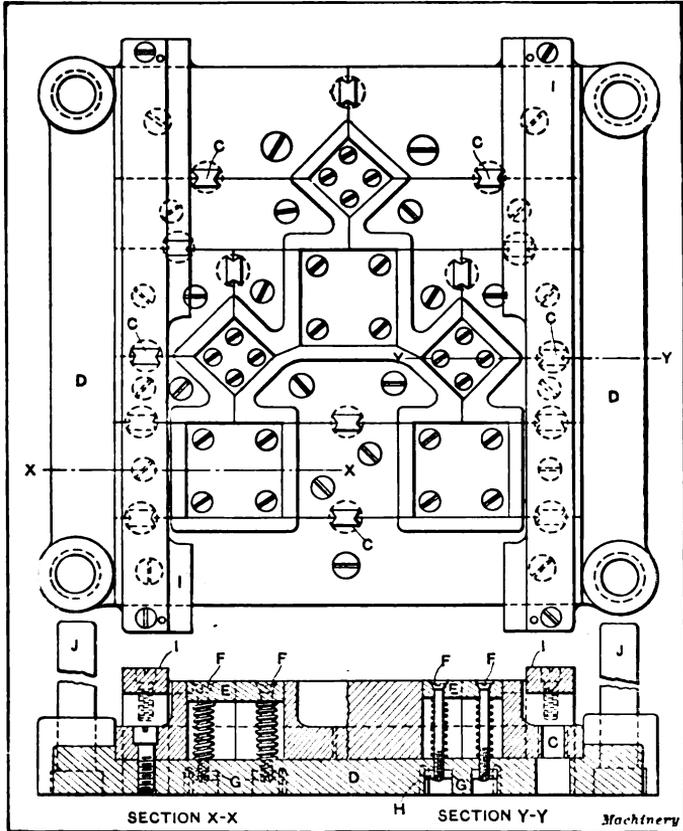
Plan and Sectional Views of Blanking and Piercing Dies
